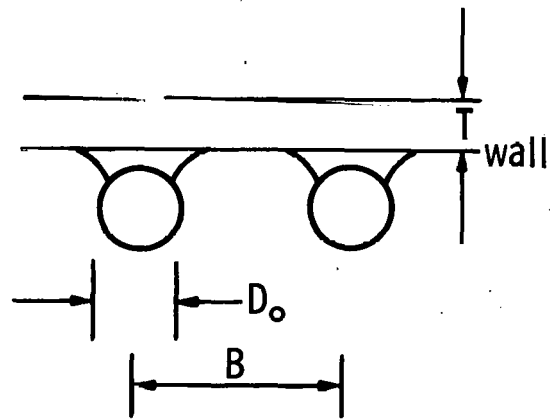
Traced-Tank Heat Exchanger Dimensions
